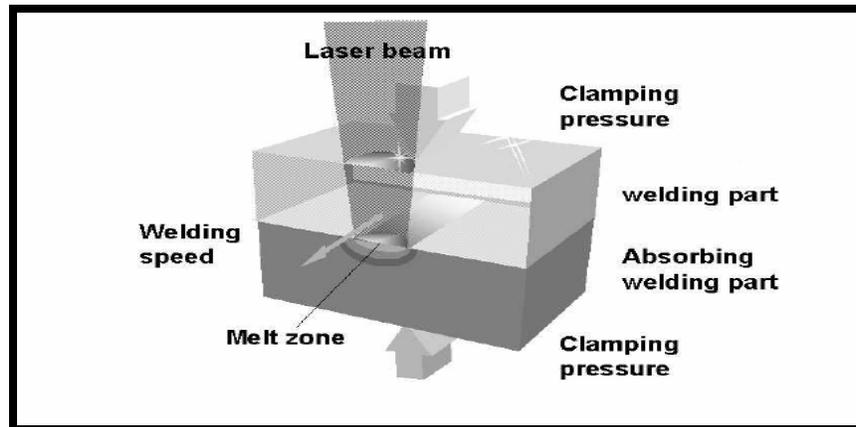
Laser beam welding process ⁽⁴⁾.
